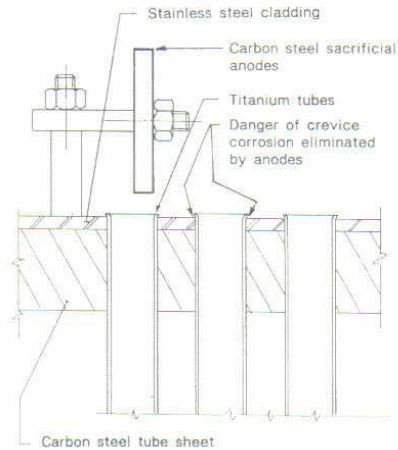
Seawater cooled heat exchanger with titanium tubes, carbon steel tube sheets clad with stainless steel and sacrificial carbon steel anodes. Reference (7)
